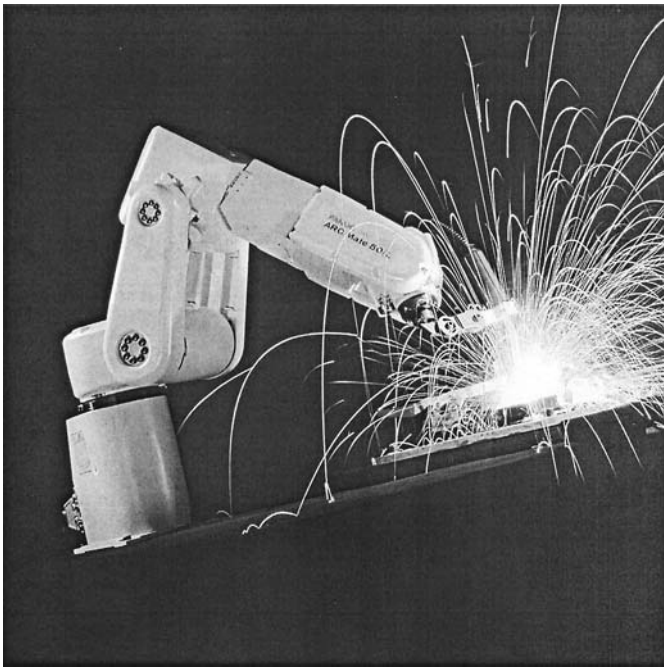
A FANUC Mate 50:L welding robot welding a part.
